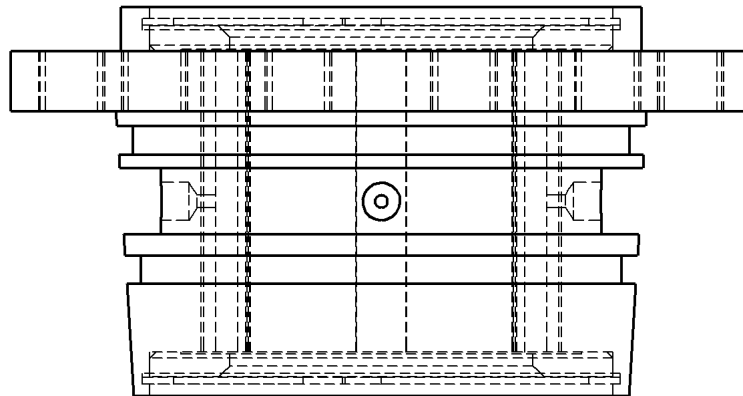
FPB top view ($m = 0.3$), bearing diameter 38.23 mm (1.505 in.).
